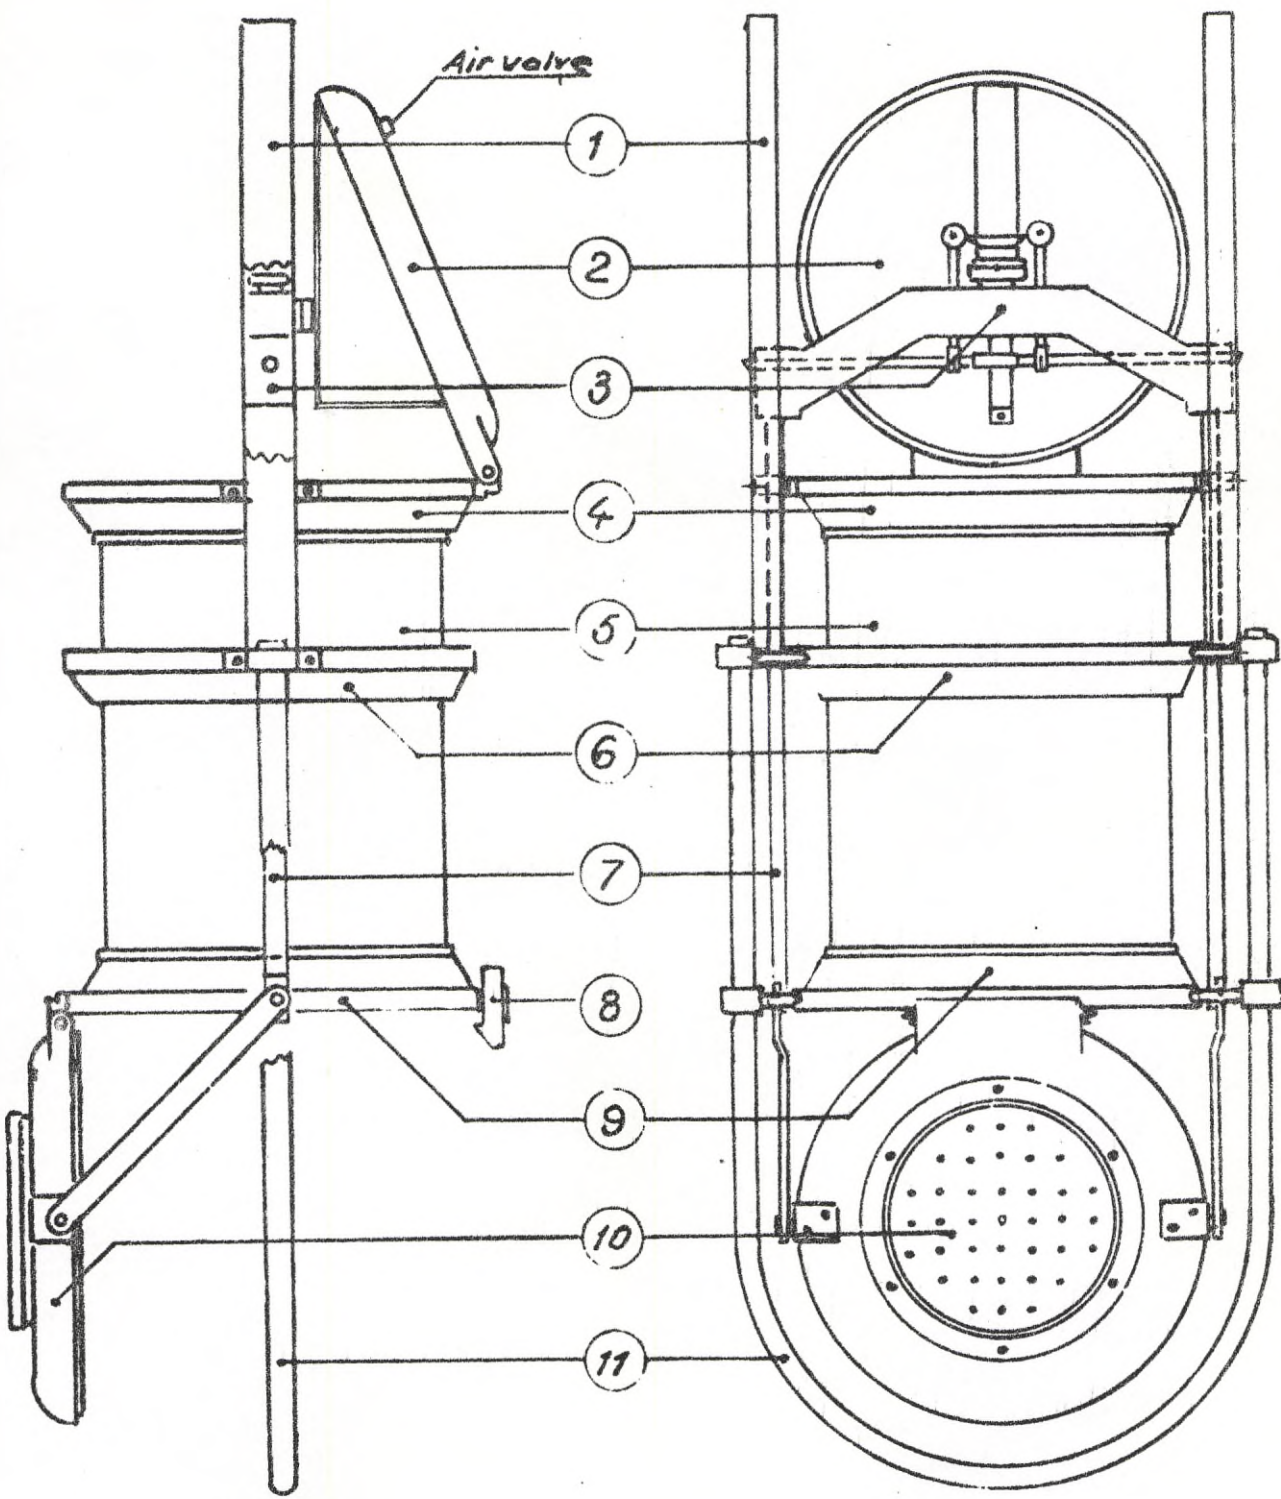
THE CONSTRUCTION OF THE PLANKTON COLLECTING SAMPLER
